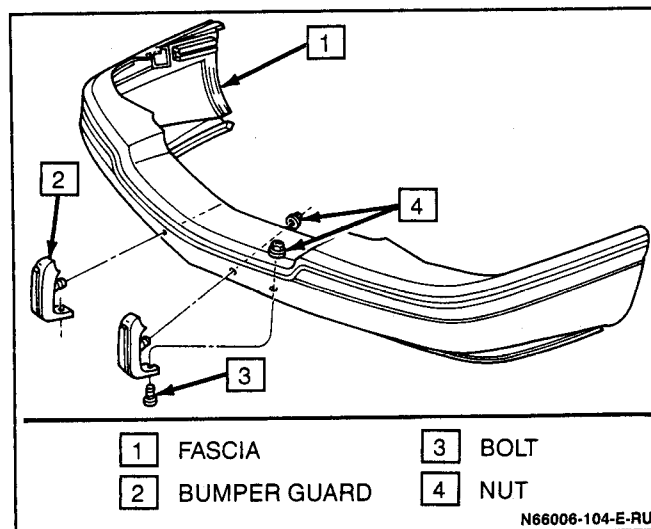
Front Bumper Guard Removal and Installation—Seville
